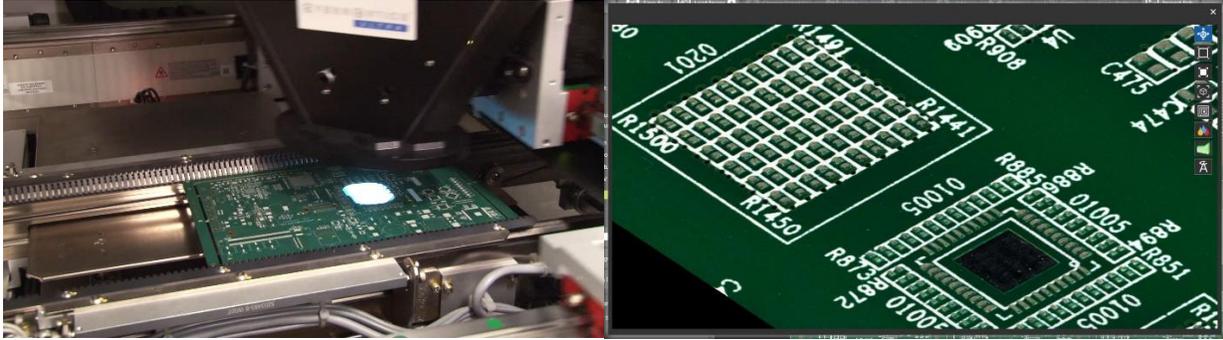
Phase Shift Profilometry is well proven and widely used to inspect printed circuit boards, surface mount technology components, and solder paste. This system is inspecting solder paste.
